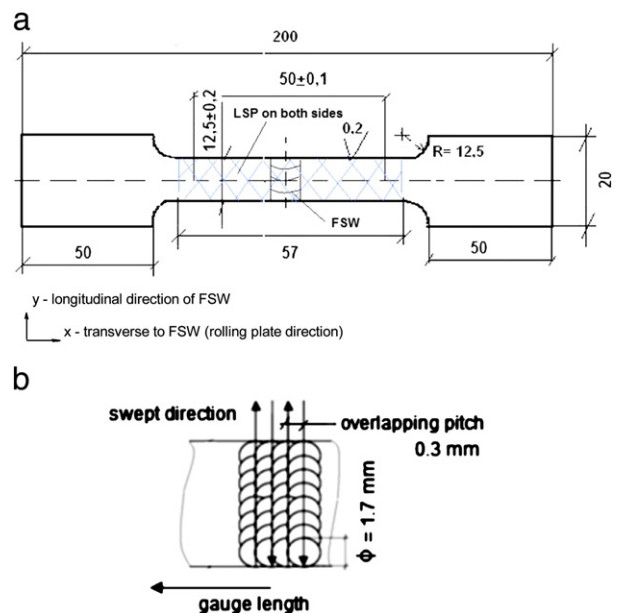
Sketch of the FSW and FSW with LSP specimen used for tension and SSC testing: a) specimen geometry with dimensions in mm; b) LSP surface sweeping strategy.
